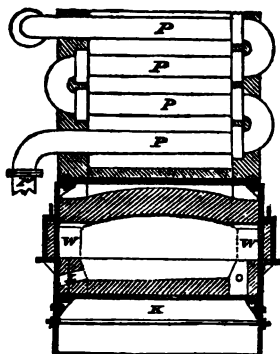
is a horizontal section, showing the plan of furnace; fig. 2, a vertical longitudinal section; and fig. 3, a transverse vertical section, showing the air-heating pipes in the stack.
